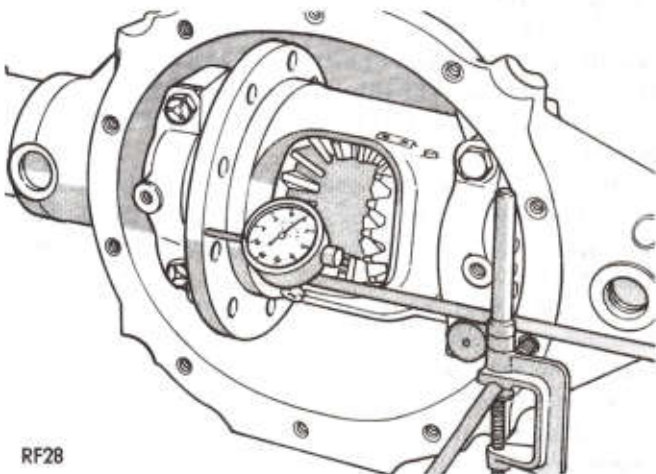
Checking Drive Gear Mounting Flange Face Runout
